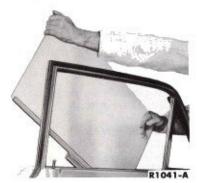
Door Glass Removal— Body Types Except 63, 76
